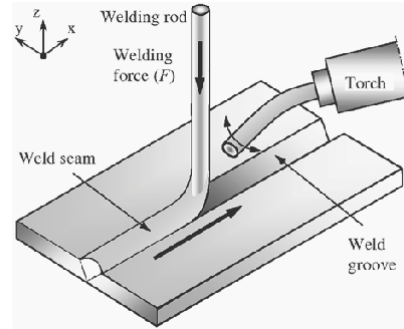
A schematic of an extrusion welding process called hot gas welding [27]
